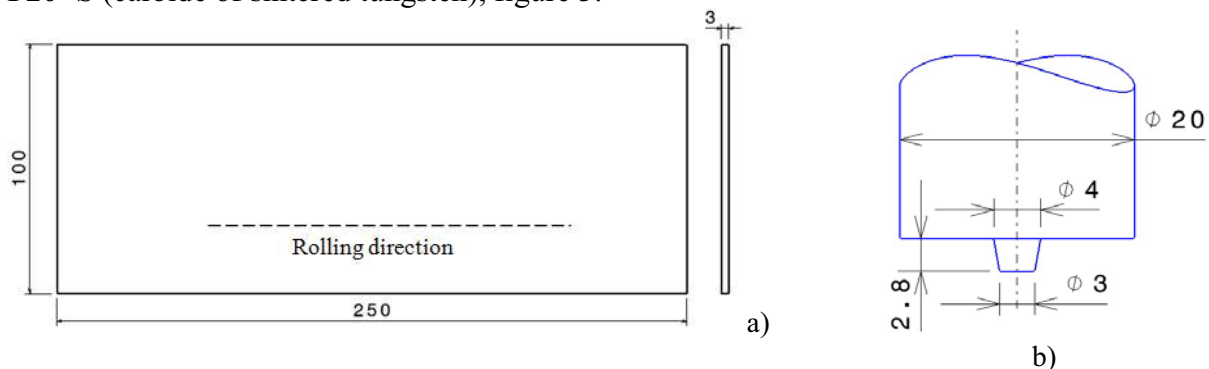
Geometry and dimensions of the workpieces (a) and of the welding tool (b)
